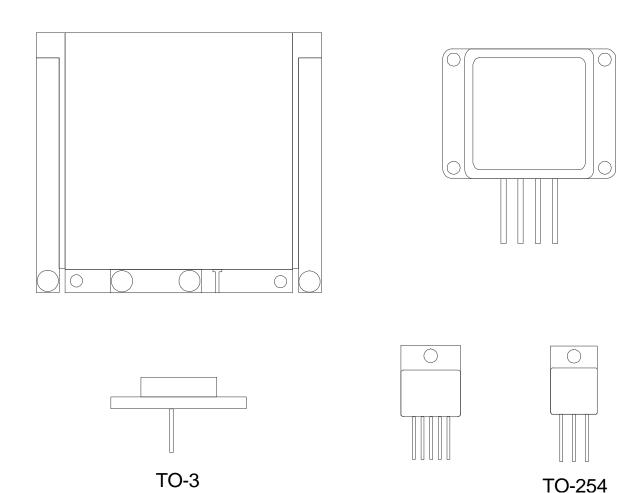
Conventional package outlines (all packages shown approximately actual size).
